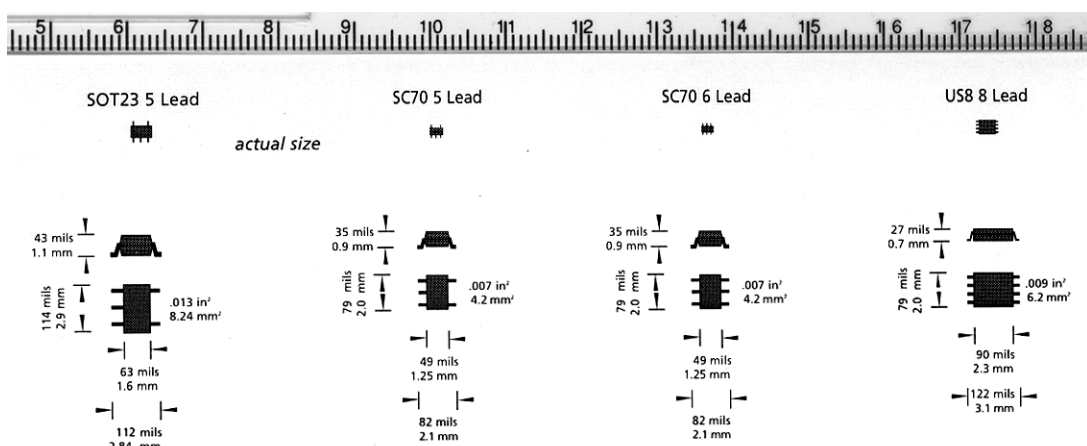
We can see the "larger" SOT23, 5-lead package, compared in size to the "medium-size" SC70 case. They are shown in larger size just below that to have a picture large enough to show dimensions on.
